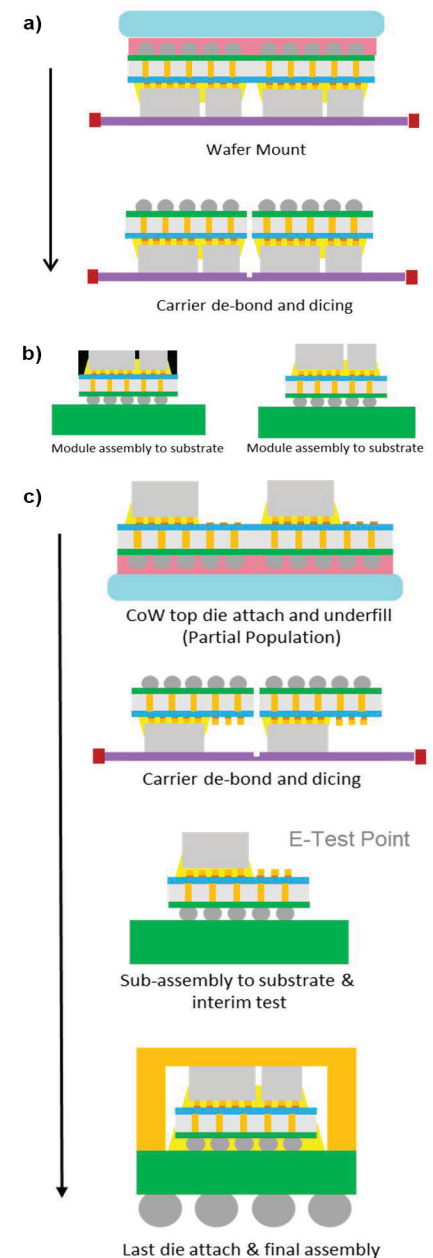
a) Wafer finish option of no-mold wafer for CoW; b) CoW module assembly – molded and no-mold module; c) CoW + CoS hybrid flow with eTest.
